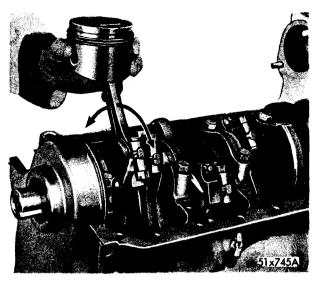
Checking Connecting Rod Bearing Clearance (Typical)
